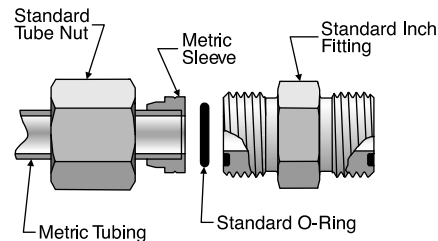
Metric sleeve adapts metric tube to standard Seal-Lok
